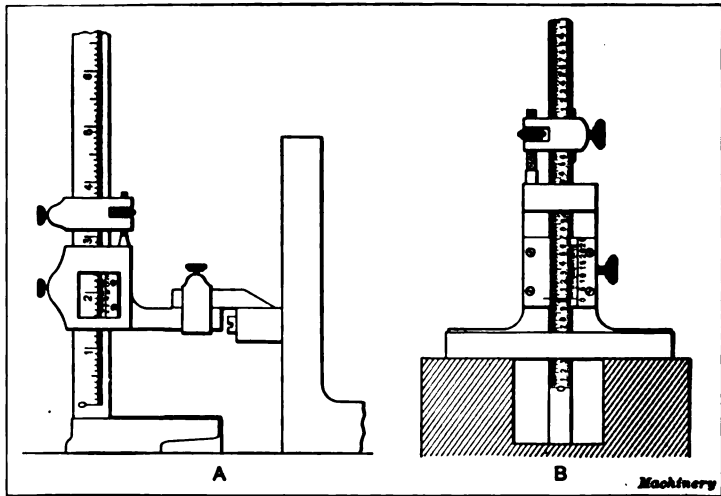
(A) Vernier Height Gage. (B) Vernier Depth Gage
